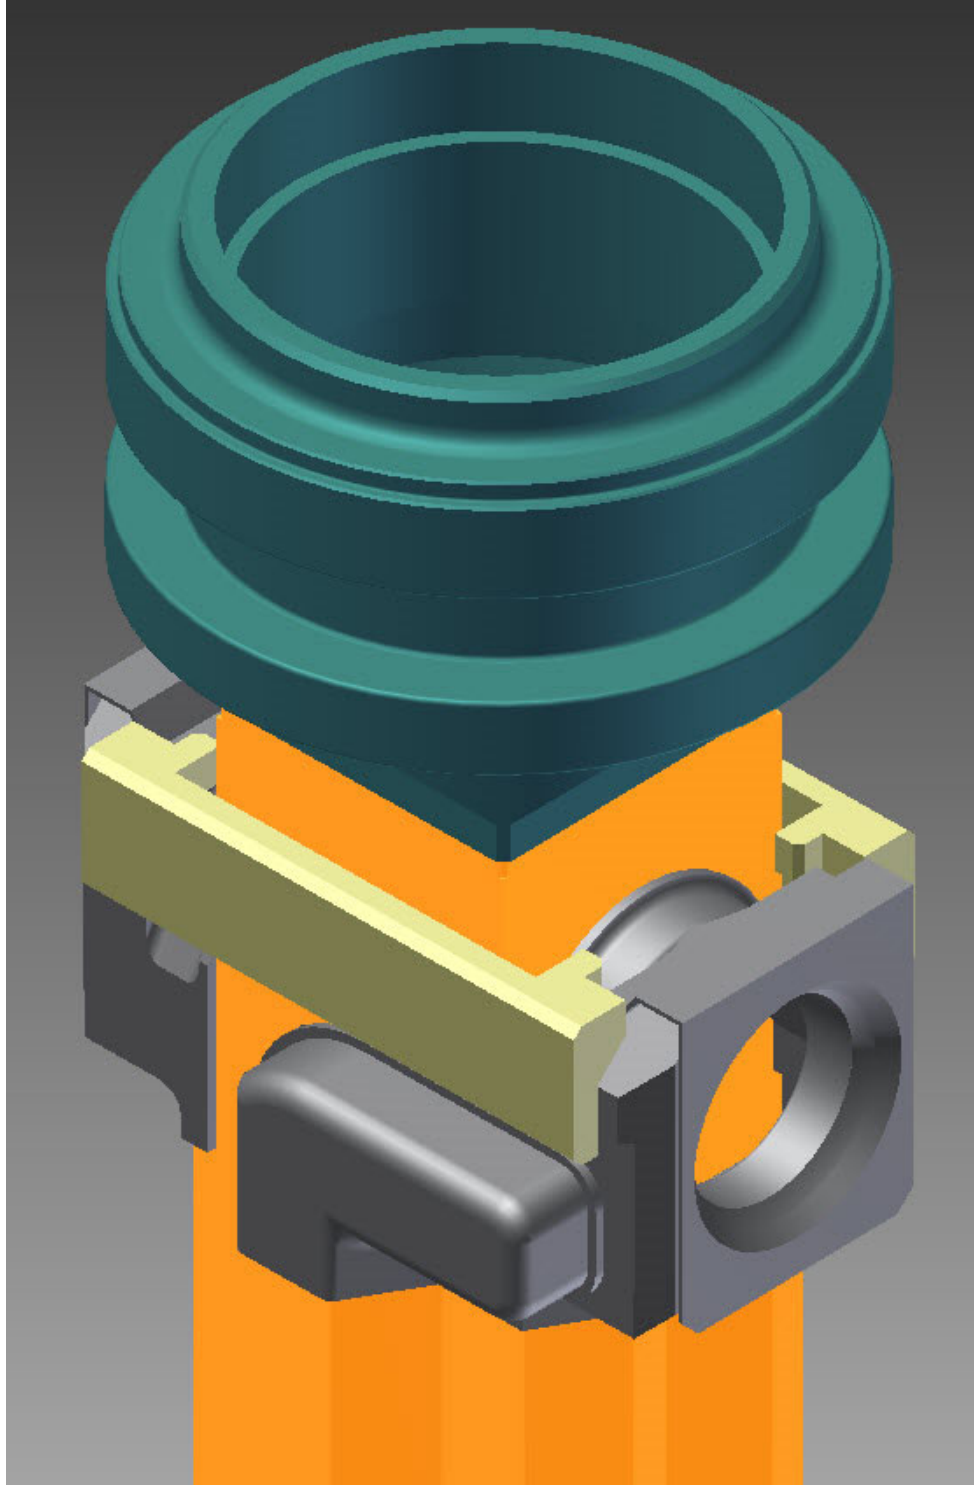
Top end of target assembly shows the vacuum flange and the ports for target coolant connections.
